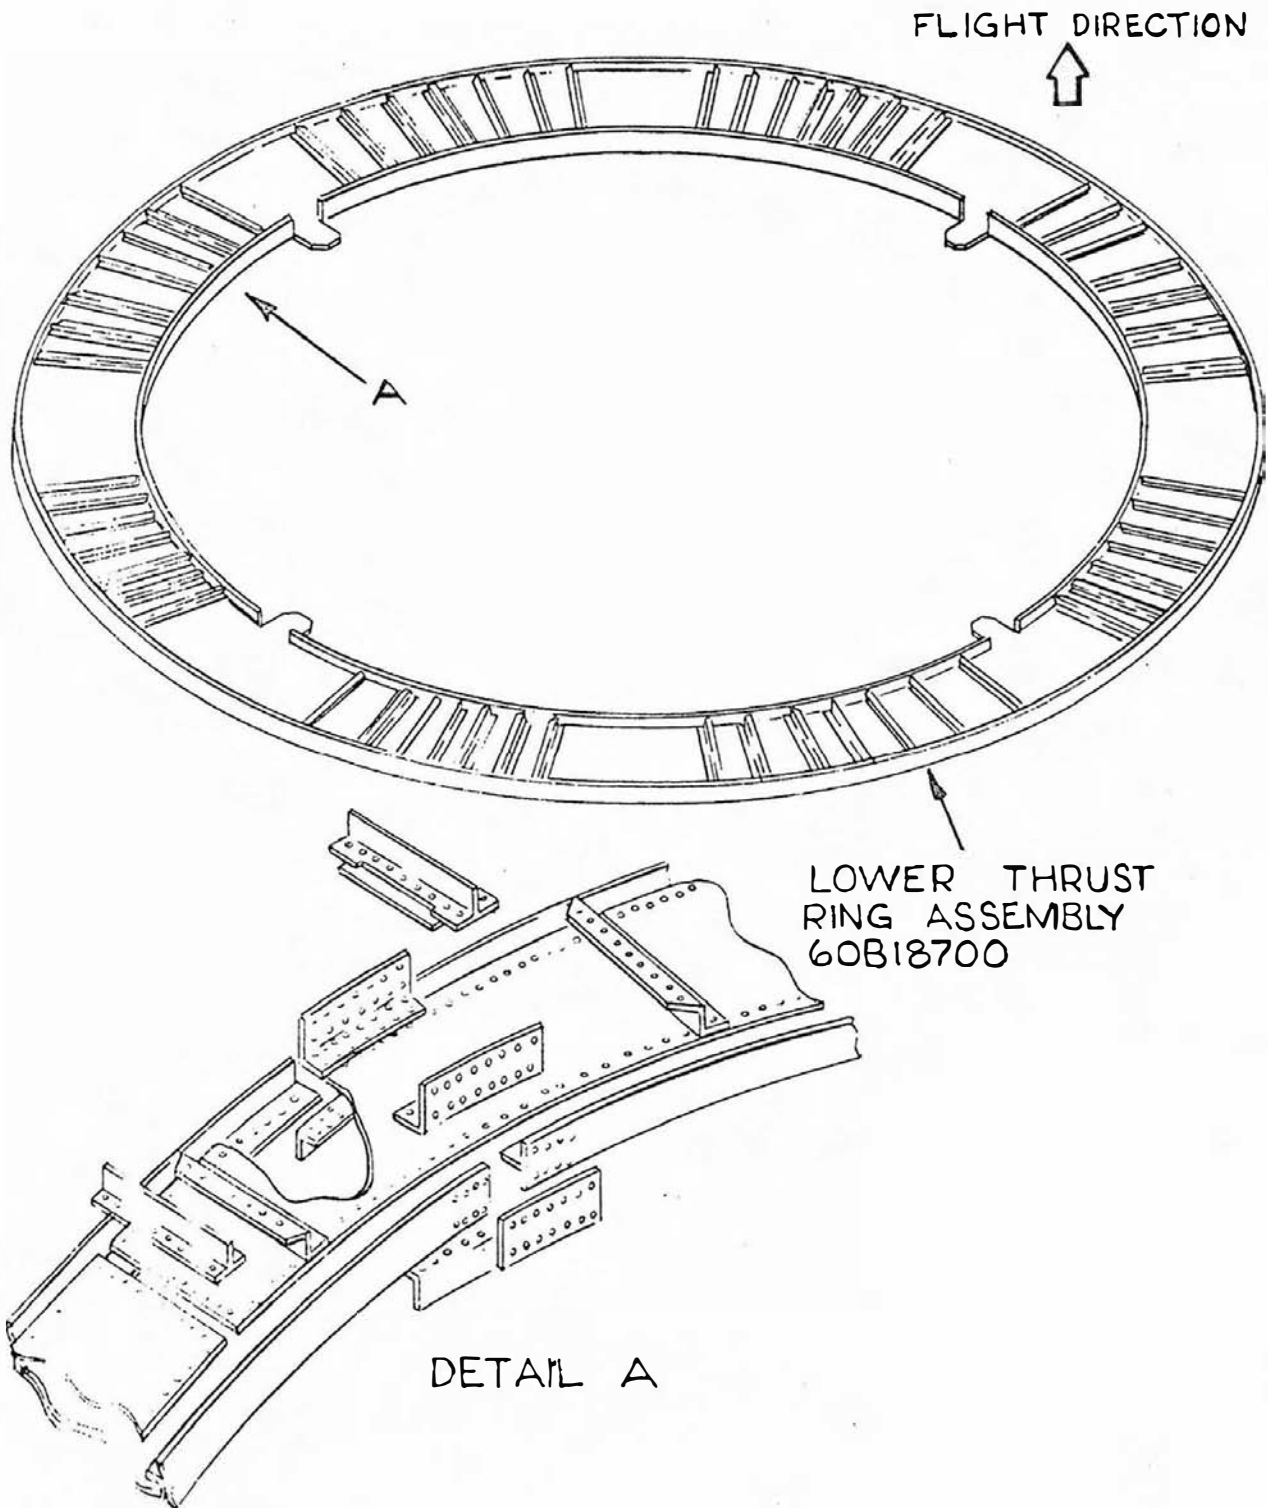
Lower Thrust Ring Assembly 60B18700
